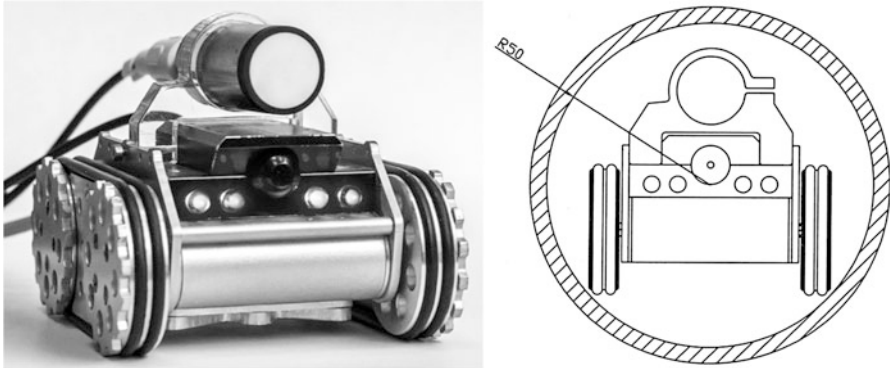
PipeScan1 inspection robot with integrated AE sensor, the view in a tube with a diameter of 100 mm
